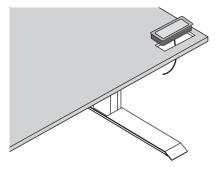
Attaching LegaDrive Touch Basic Inlay handset to example desk
